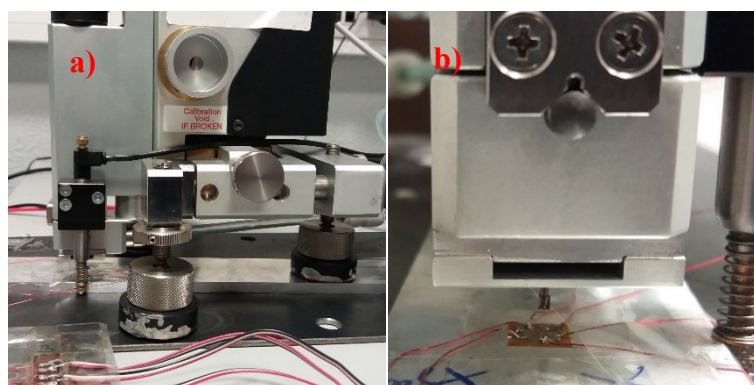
a) Hole-drilling set-up for the machining-induced residual stress measurements and b) zoom of the drill bit
